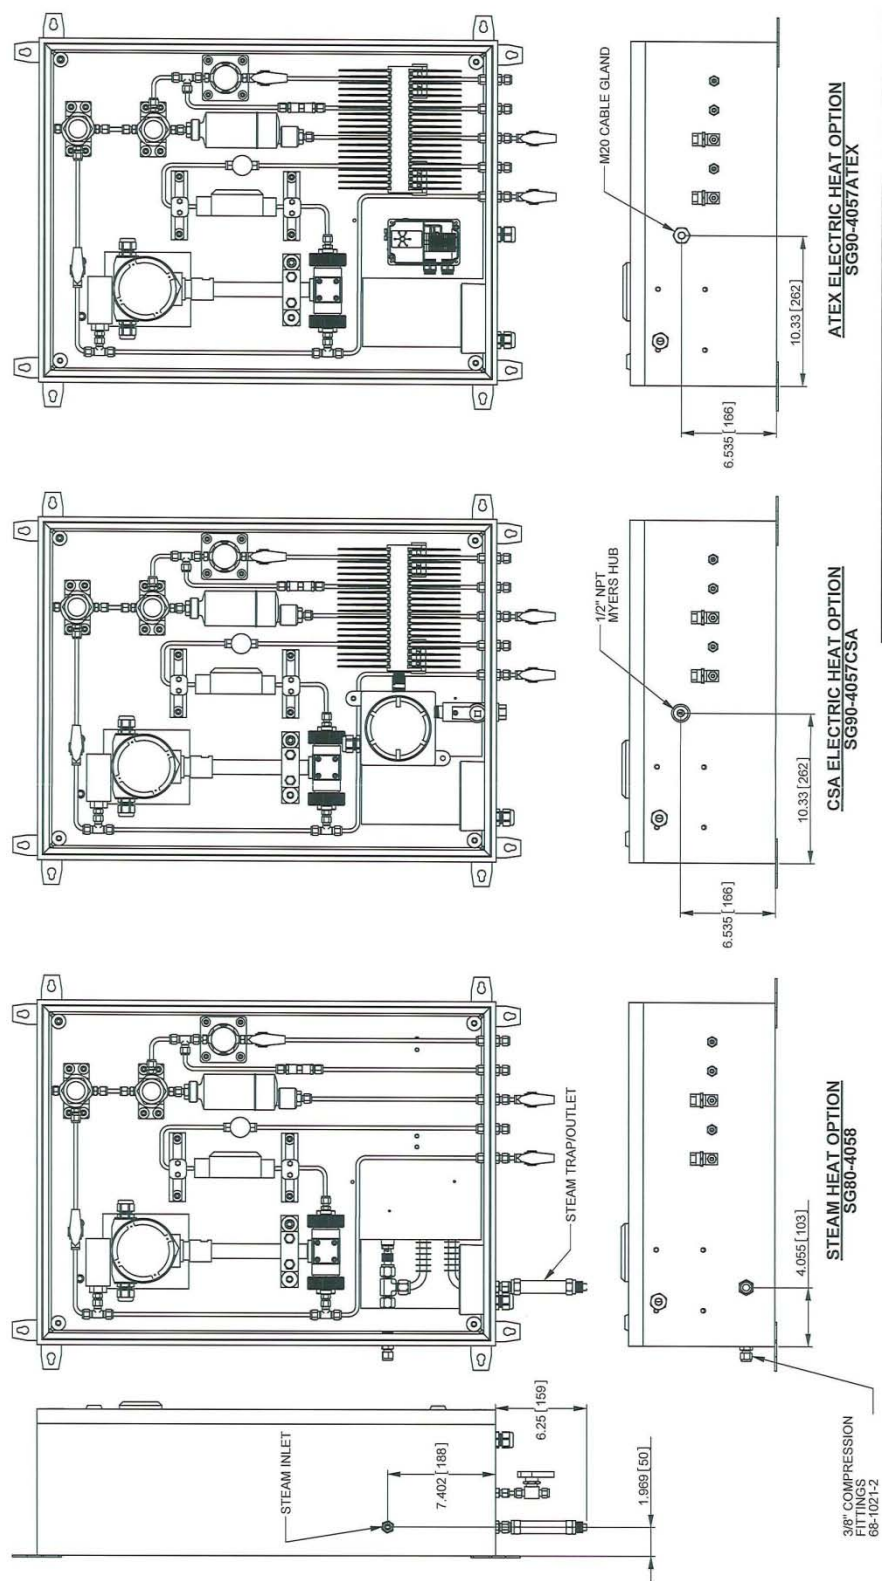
SG91-6000: General assembly drawing, wet gas system (sheet 3 of 3)
